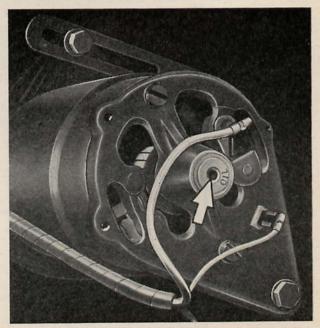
Location of oil hole (indicated by arrow) in generator end bracket for lubricating armature rear end bush
